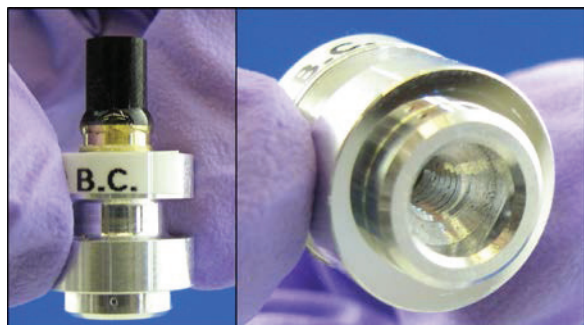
Aluminum pedestal with CRF mounted to the top. The bottom surface of the bottom ring and the inside of the cylinder are diamond turned to mate with components of the puck.
